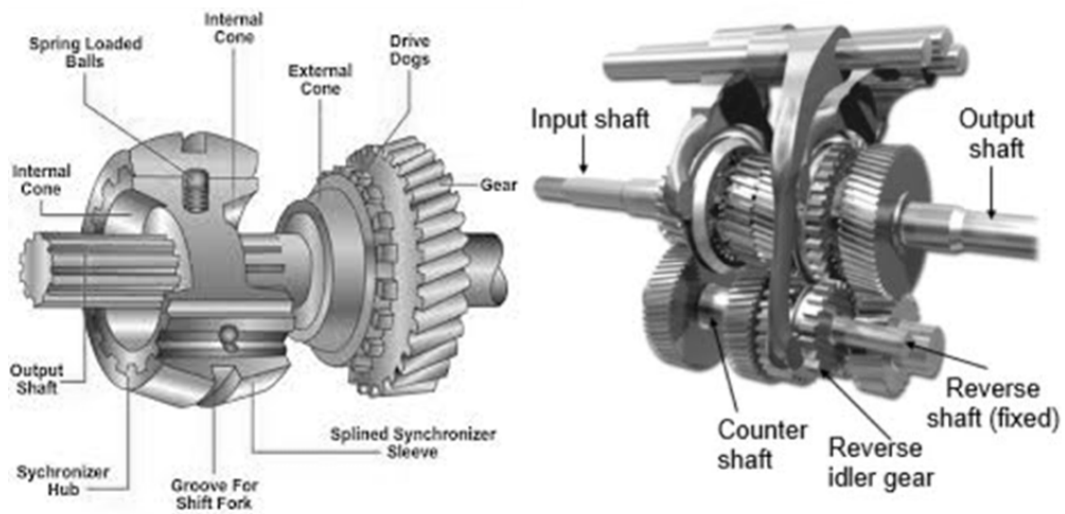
Two different shifting mechanisms with (a) frictional cone and (b) fork mechanism for constant meshing [5, 6].
